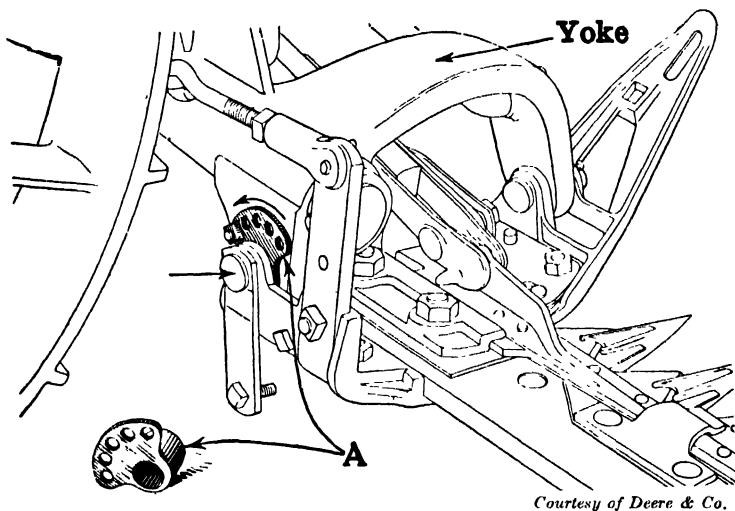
Eccentric bushing used for aligning cutter bar.
